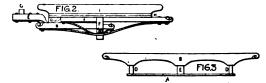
Side Elevation, Showing Woodwork and Iron Trusses.
